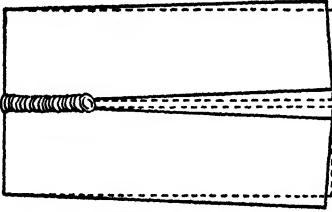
Note that the plates are spaced apart slightly more at one end. When welded, the cooling and shrinking of the bead will pull them into alignment.
